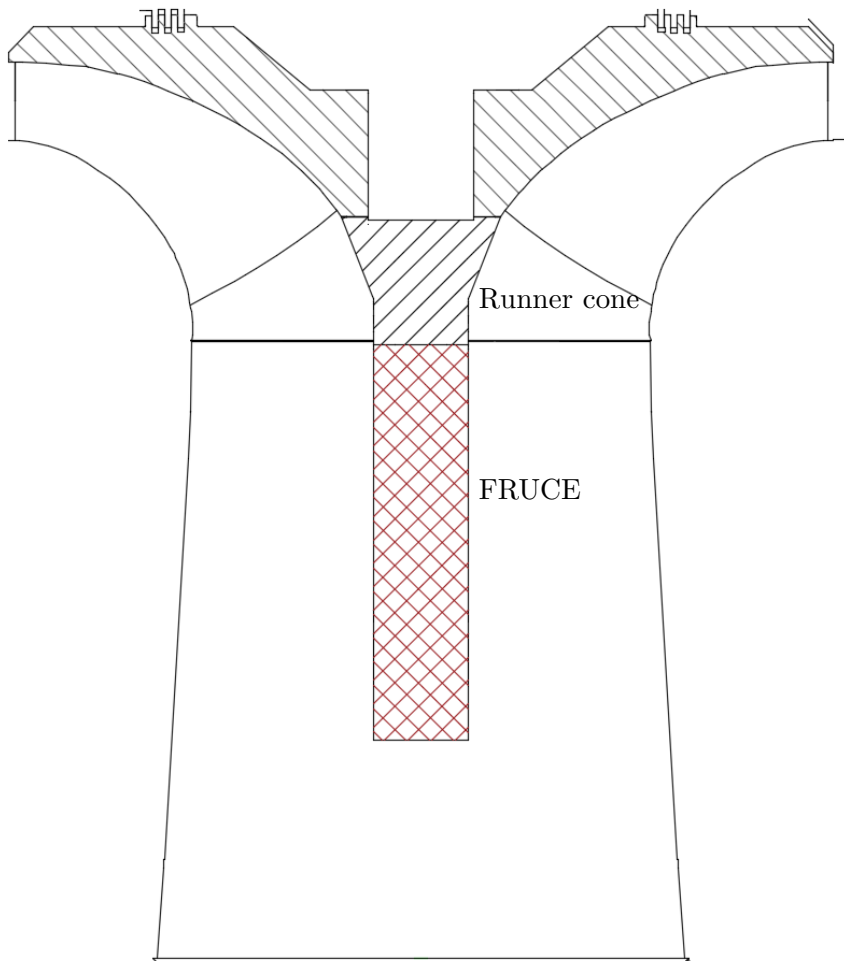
Cross section of the FRUCE. The red part is the rotating part of the FRUCE. Inside the outer part are two sets of bearings to keep the outer part in place.
